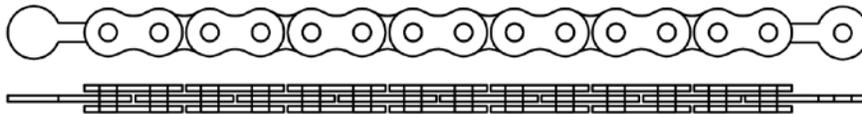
Type II, class 11, weldless mechanical communication chain.
